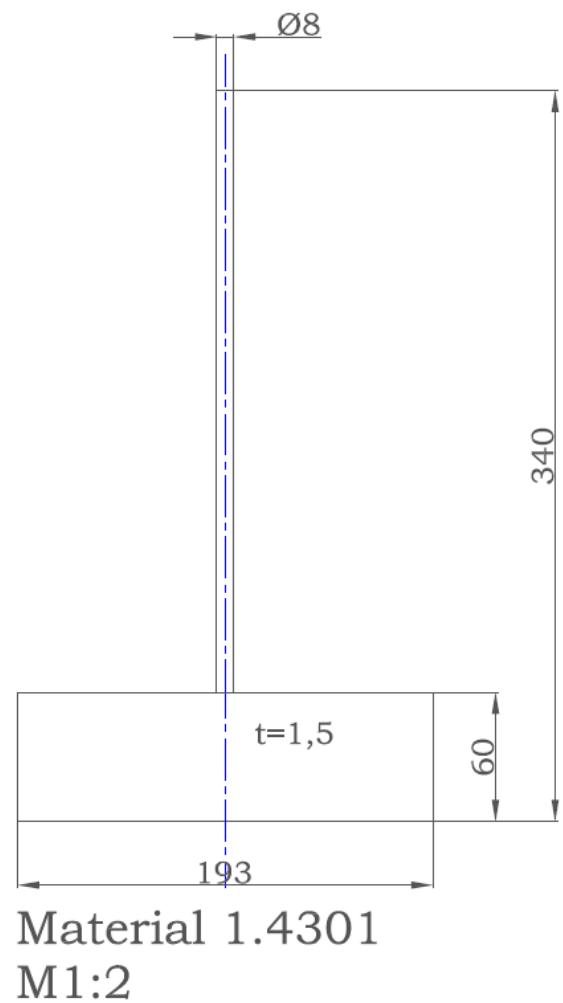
Dimensioned drawing of blade stirrer for coarse screening
